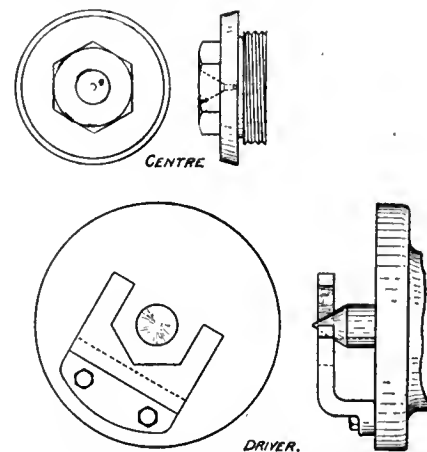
TOOLS USED IN GRINDING OPERATIONS.
